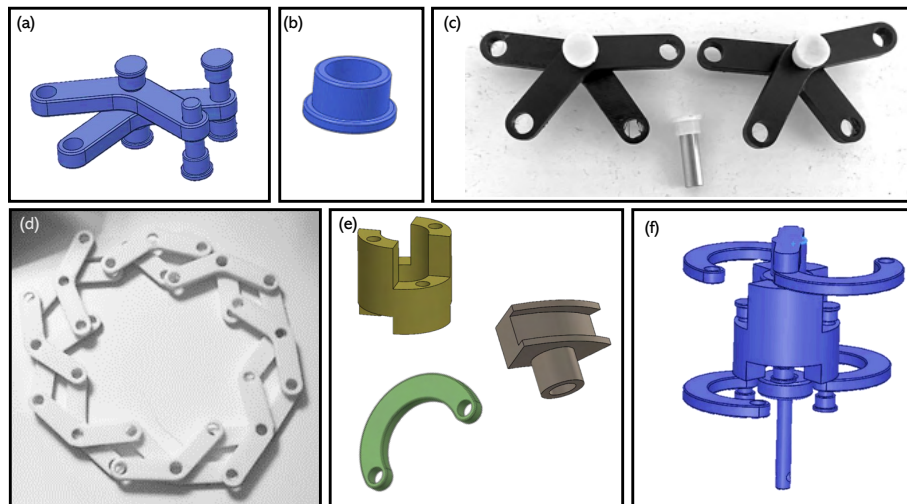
Example parts of the Hoberman metastructure including (a) CAD of the scissor pattern (b) CAD of an endcap (c) additively manufactured scissor pattern (d) scissor pattern assembled loosely from additively manufactured parts (e) CAD of central core part (top left) belt rail (middle right) expansion arm (bottom left), and (f) CAD model of the central core with attached arms.
